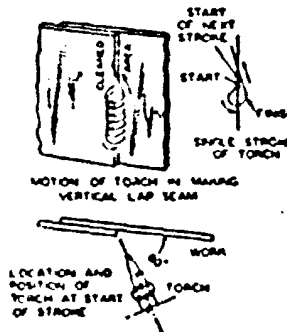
Technique of welding lap joint in vertical position
